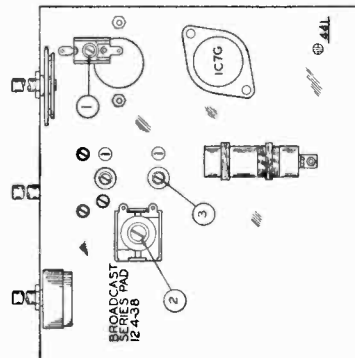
BOTTOM VIEW SHOWING TRIMMERS
